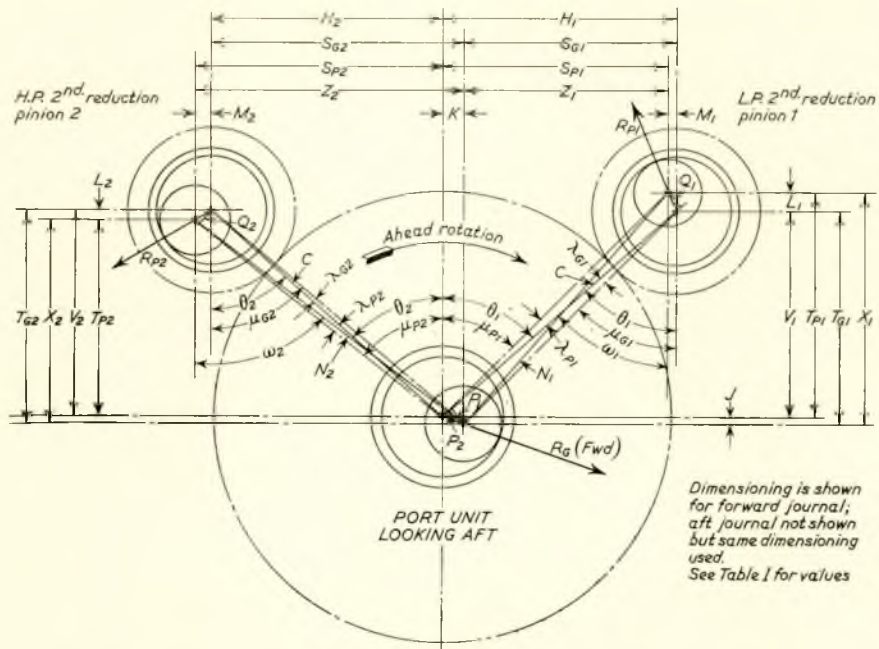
Geometric relationship of pinion and bull gear shaft centres with unequal load on bull gear bearings
